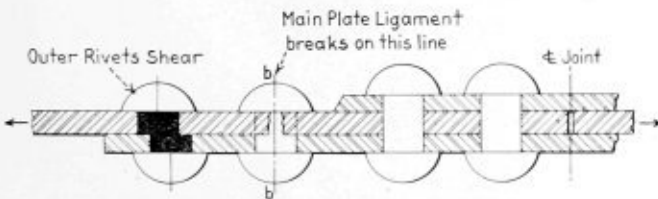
Failure of Double Butt Strap Joint Through Second Row of Rivets; Failure (T + Sh)
